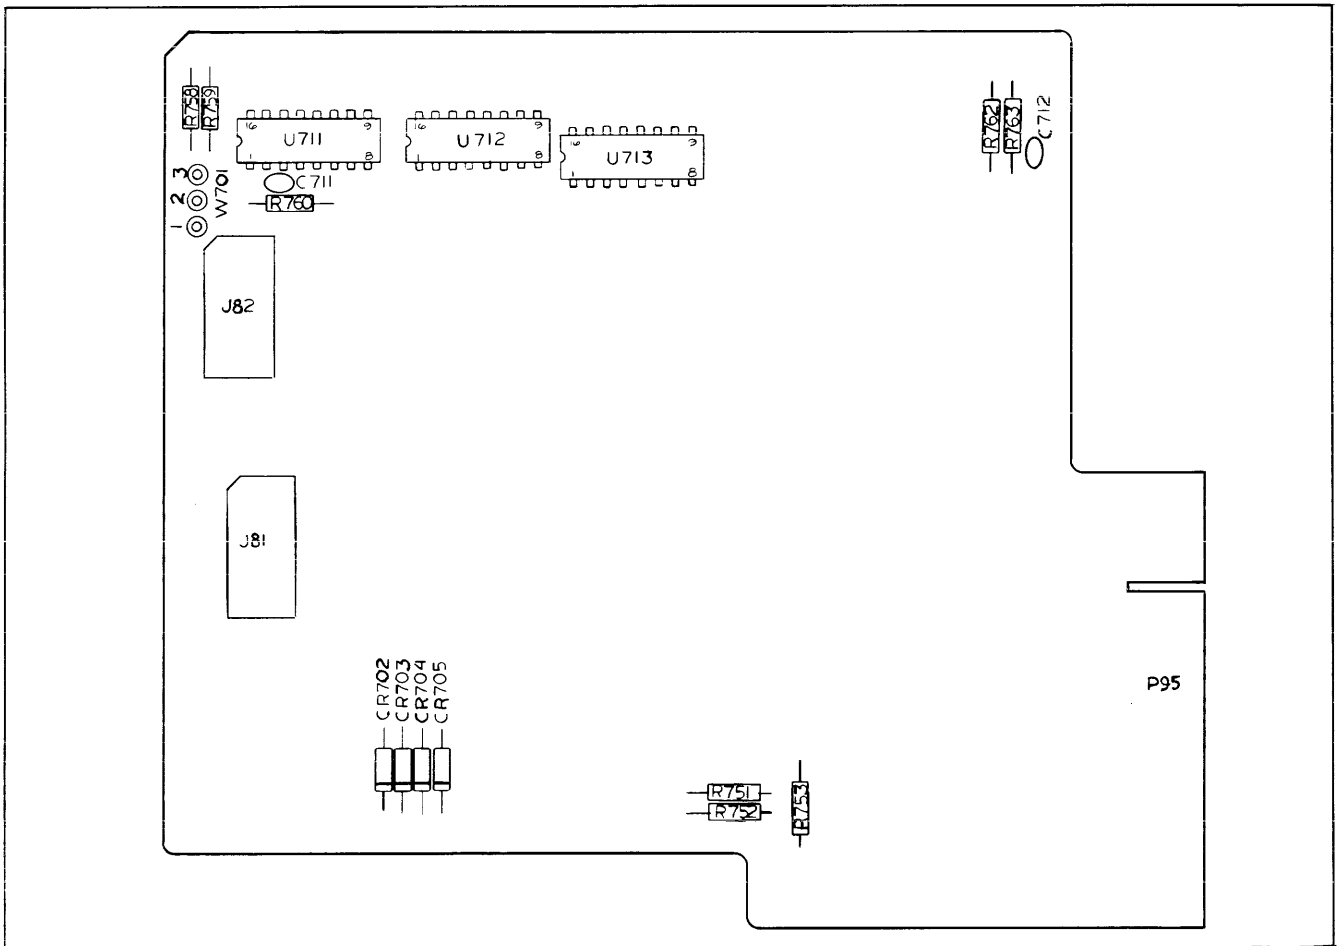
A10 Basic Remote Control Unit PCB Assembly
